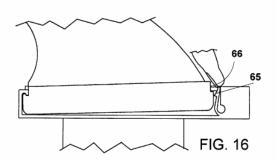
A drawing explaining the design of expired patent US 6,695,662 B2 [44].
